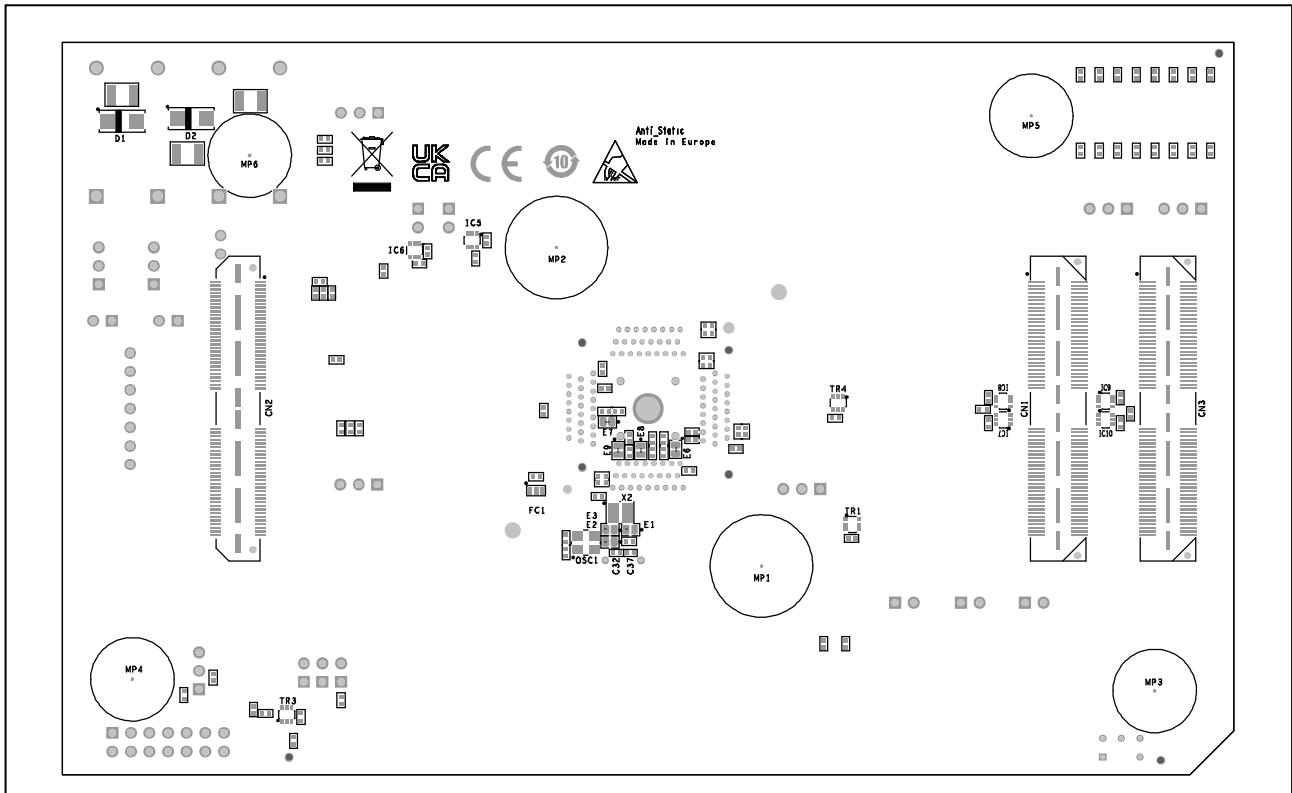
Piggyback board bottom view of board version D020647_06_V02
